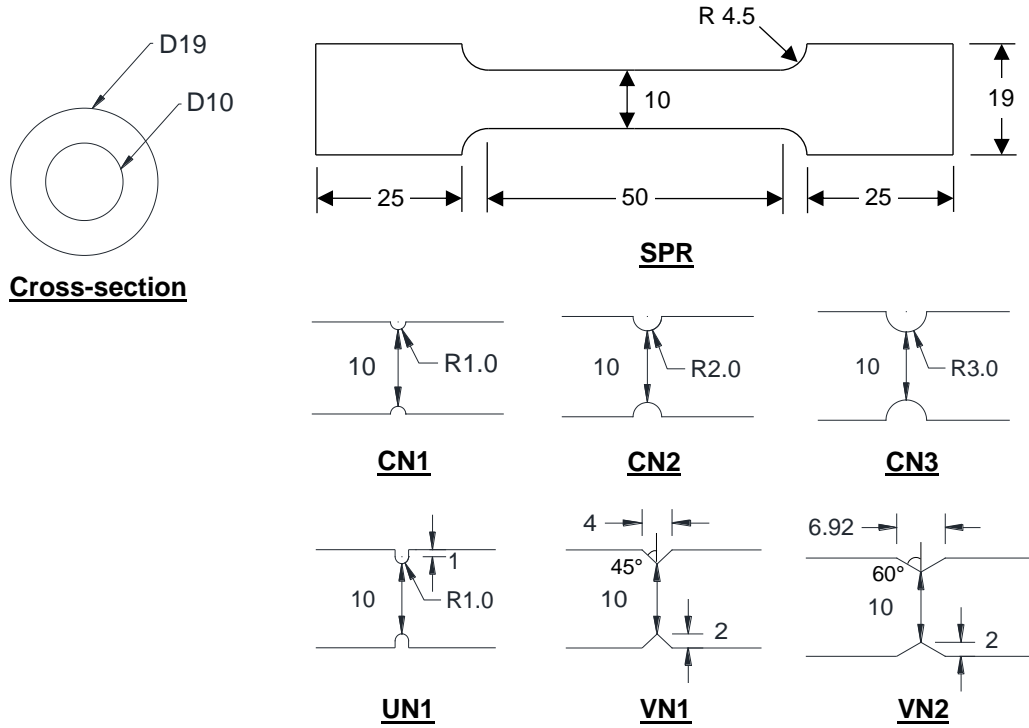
Geometric details of typical test specimens (all dimensions are in mm).
